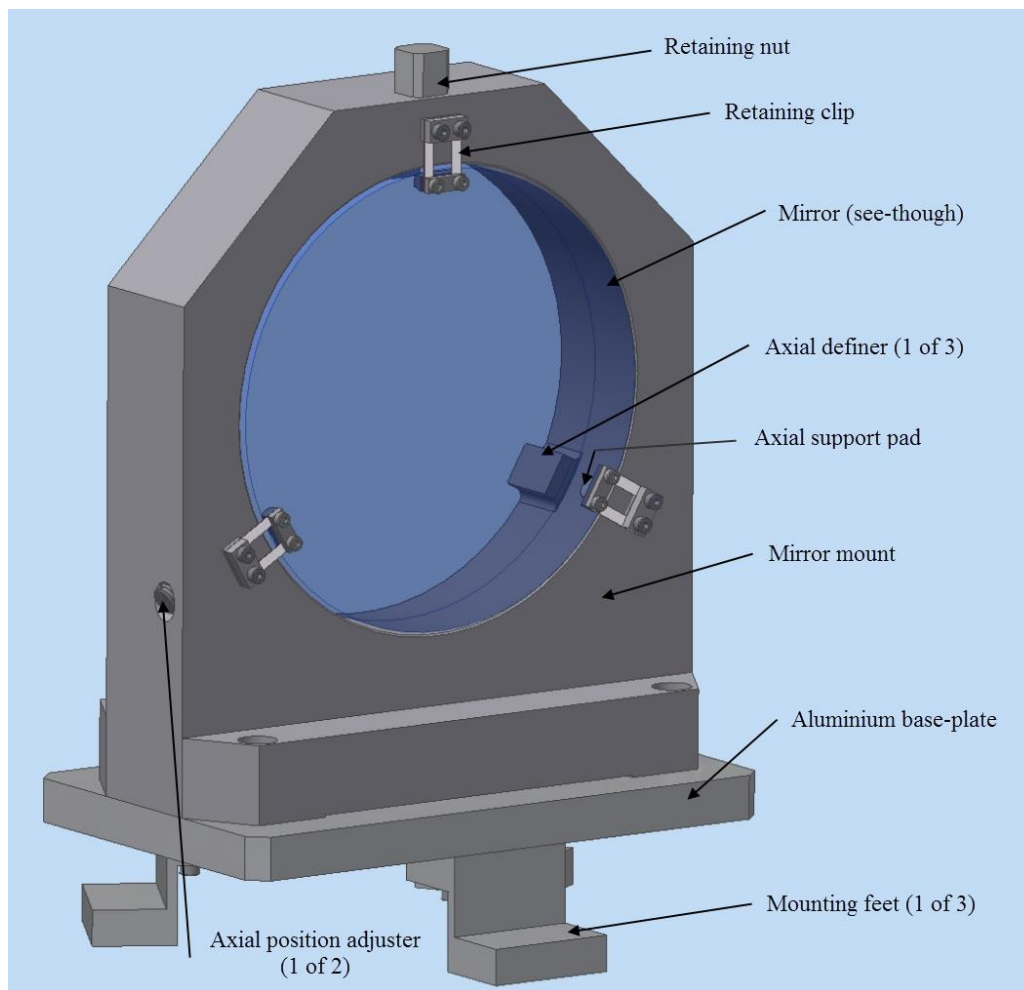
FLC Mirror mount. The mirror is shown as a see-through part for clarity, and is retained against three axial defining tabs by three spring-loaded retaining clips fitted to the face of the mount. The mirror is supported axially by two adjustable pads and retained against them by a spring loaded nut on top of the mount. The aluminium plate is an interface between the mirror mount and the three mounting legs which screw into it. The mounting legs are clamped to the Nasmyth table when the mirror has been positioned but allow some flexibility to account for thermal expansion between the assembly and the steel optical table.
